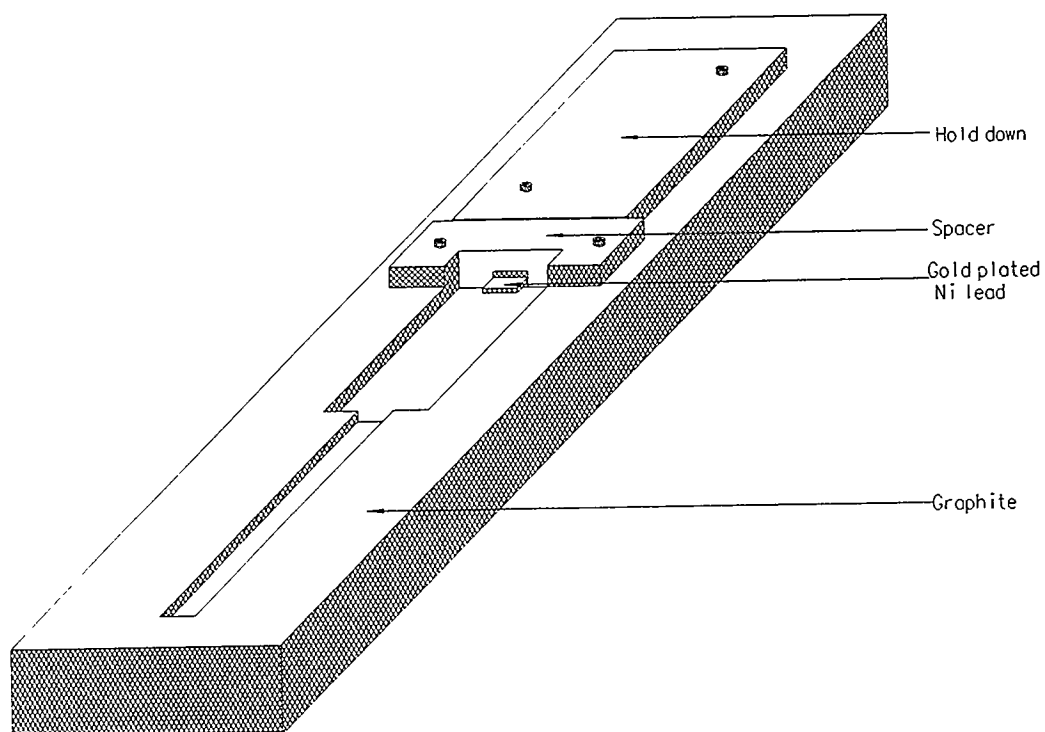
Modified Mold for Casting Prototype Thermal Fuses.
